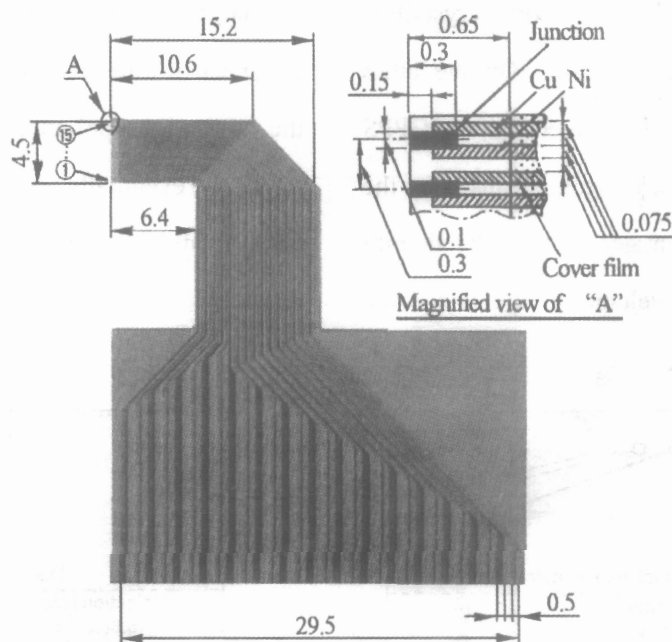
Shape of Integrated Thermocouple Sensor (Units : mm)
